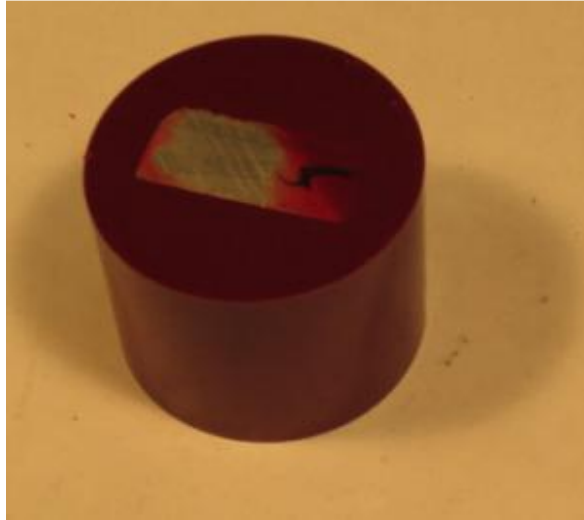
Typical Example of Sample After Cutting Process. Note the Aluminum Coating on Top (Pure Al) and the Saw Marks on the Cut Side (Facing Front). Sample is 3/8" wide
